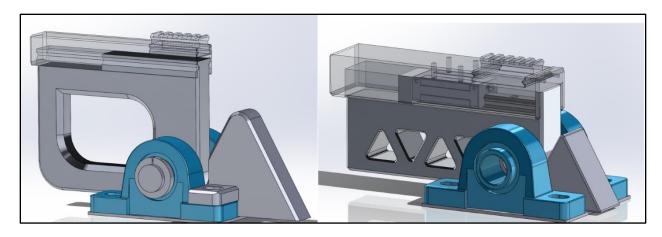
Original Mounting Design (left) New Mounting Design (right)
